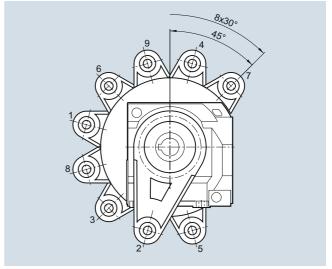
/12 Helical worm gearboxes CAD., Figure 2, sizes 39 to 89
